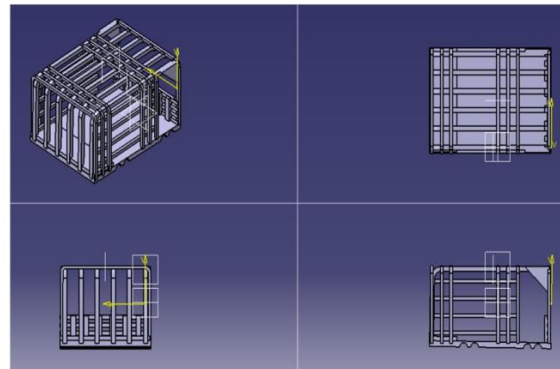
Final 3D view of frame less chassis of bus in multi views
